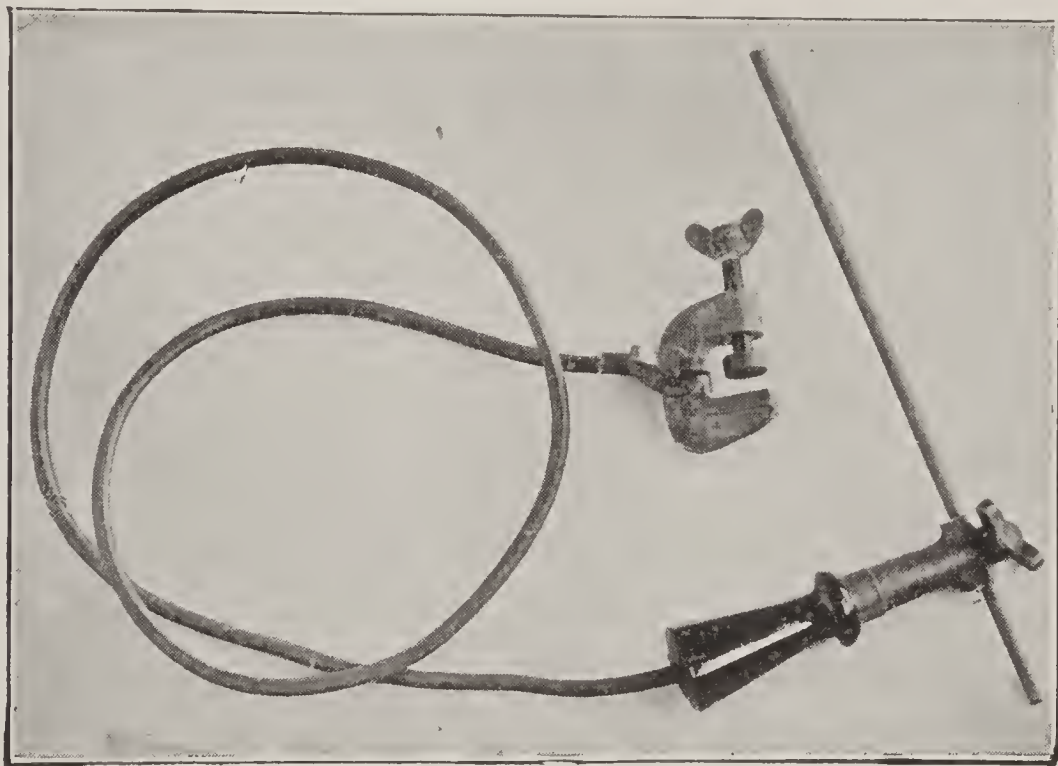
Arc-Welding Outfit for Burning Connections
